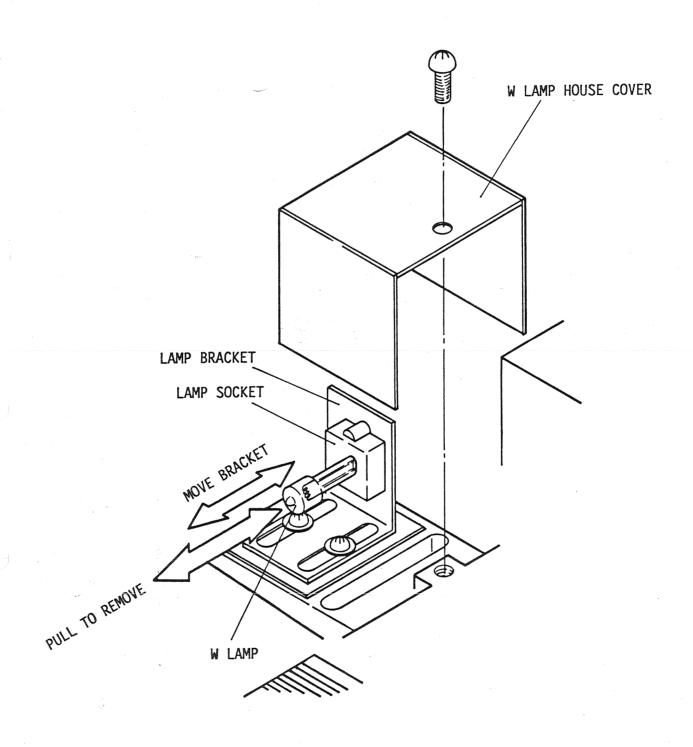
Partially Exploded View of W Lamp House Assembly
